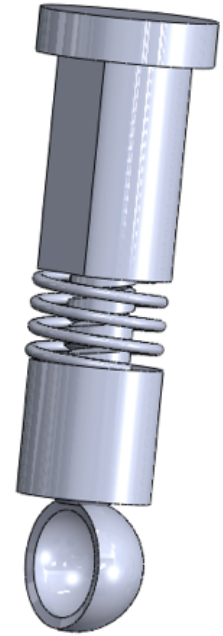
SolidWorks drawing of screw design for z-axis translation.
